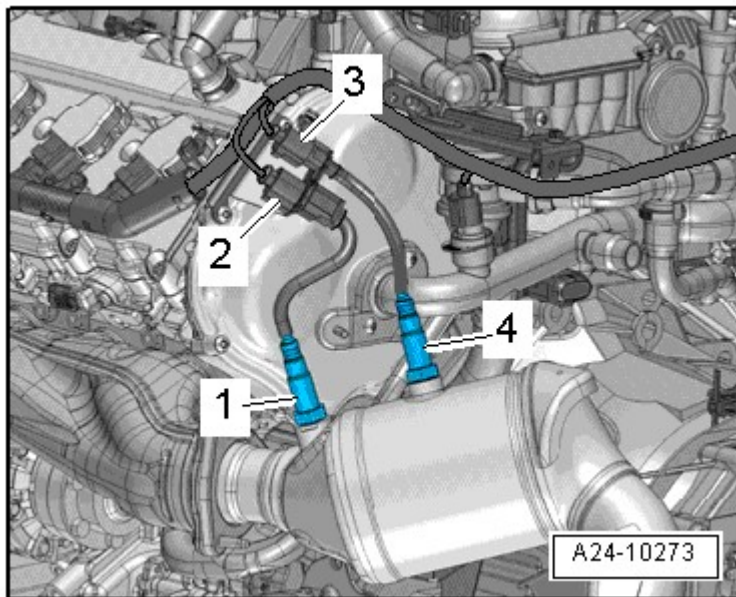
Identifying Oxygen Sensor Electrical Connectors
